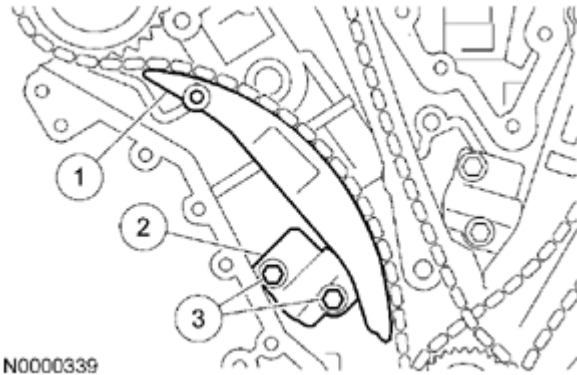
Identifying RH Timing Chain Tensioner, Tensioner Arm And Bolts
